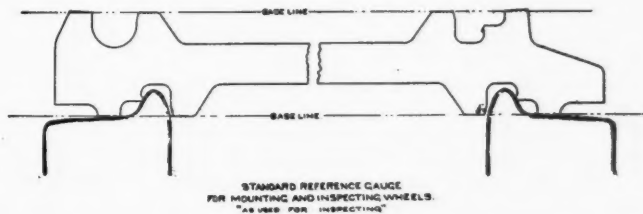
Use of Standard Reference Gage for Inspecting Wheels.
